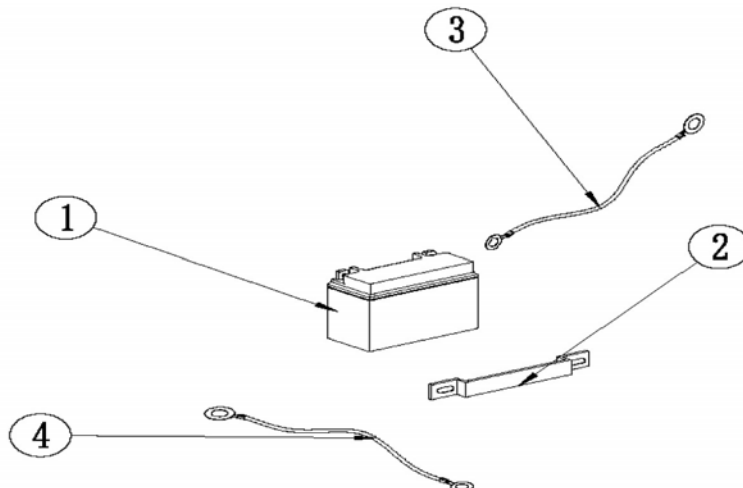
Spare parts drawing 9 PG-I 42 SE
